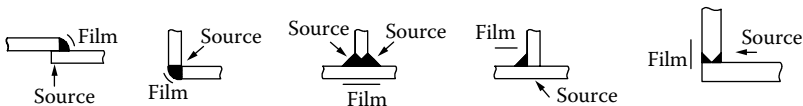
Common RT techniques for corner fillet welds.
